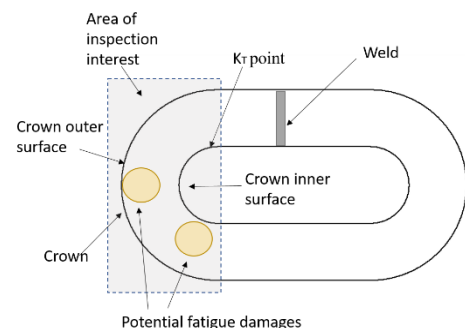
NDT inspection focused areas due to high stress which can cause fatigue cracking [20], [19].
